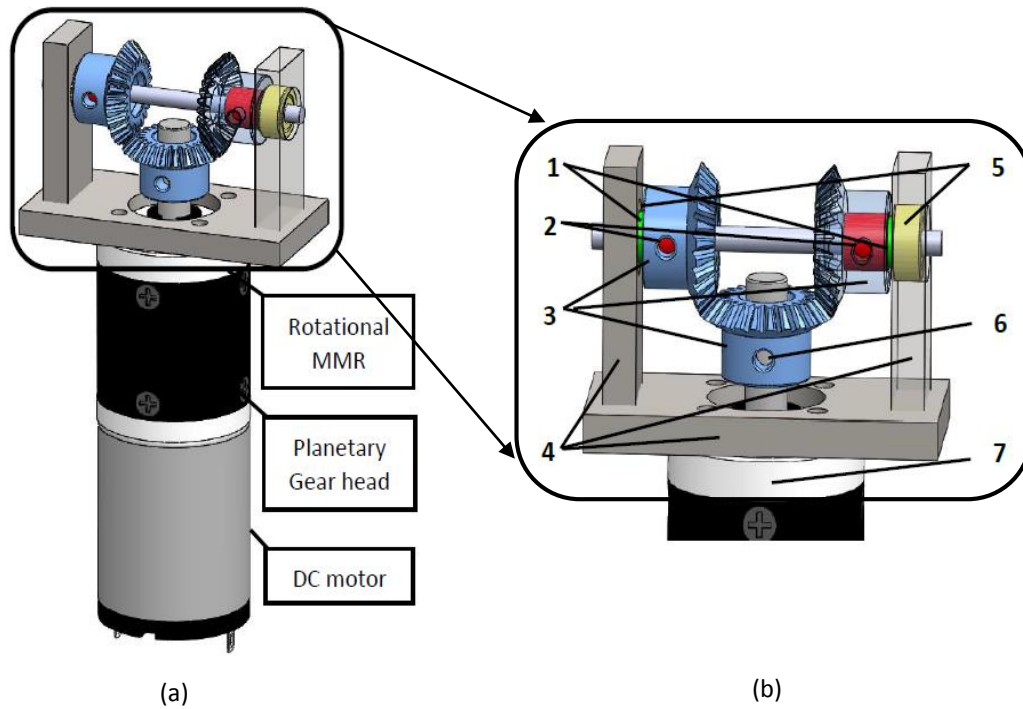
(a) detailed design of MMR-PEH and (b) components of the rotational mechanical motion regulator (MMR): 1. Thrust bearing 2. Roller/one way clutch 3. Miter gear 4. Fixture 5. Ball bearing 6. Planetary gearhead shaft 7. Planetary gearhead
